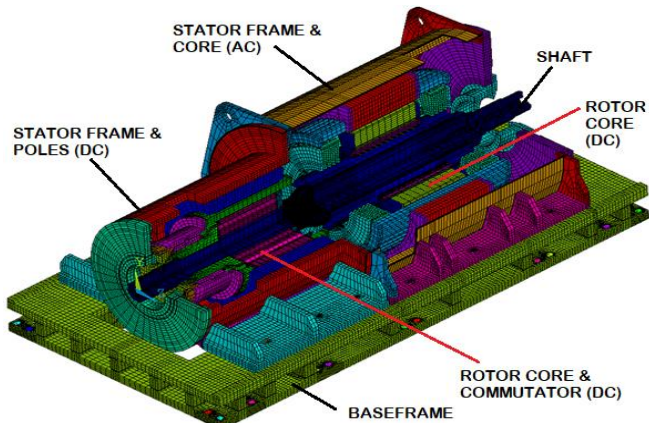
Meshed model of Generator Set Assembly (Ansys Mechanical APDL)
